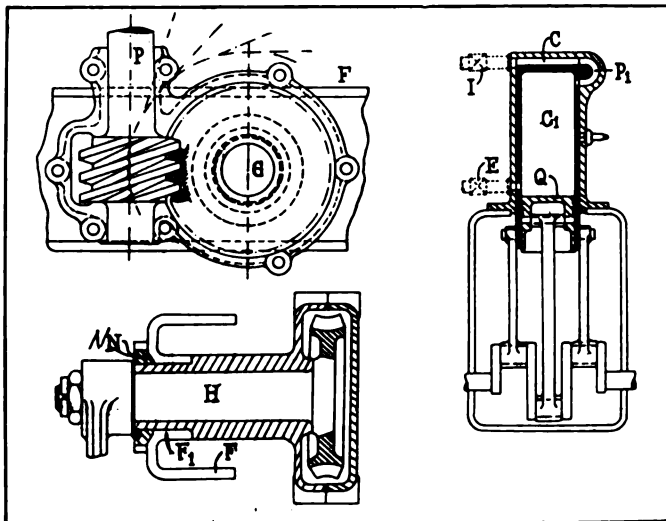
Leruitte steering gear. Fig. 13—Downie engine
